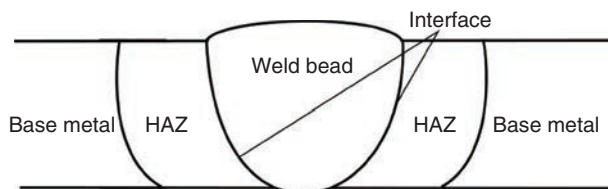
Image of the different zones in a weld: Weld bead (fused material), heat affected zone (HAZ) and base metal not affected by heat.
